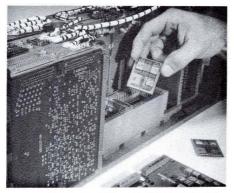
SUBASSEMBLIES OPEN FOR EASY ACCESS. Each of the subassemblies is mounted in the structural frame so that replacement or repair is relatively easy. Figure 29 shows circuit board being installed in the information driver assembly. The X select, Y select, and timing and control assemblies are similar in construction. Each consists of two multilayer circuit boards mounted on an aluminum frame. The frames are hinged to the main structure and swing upwards for circuit element and test point exposure.
